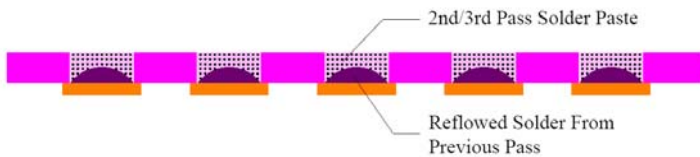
Low Profile and Normal Dimension Solder Bumps
